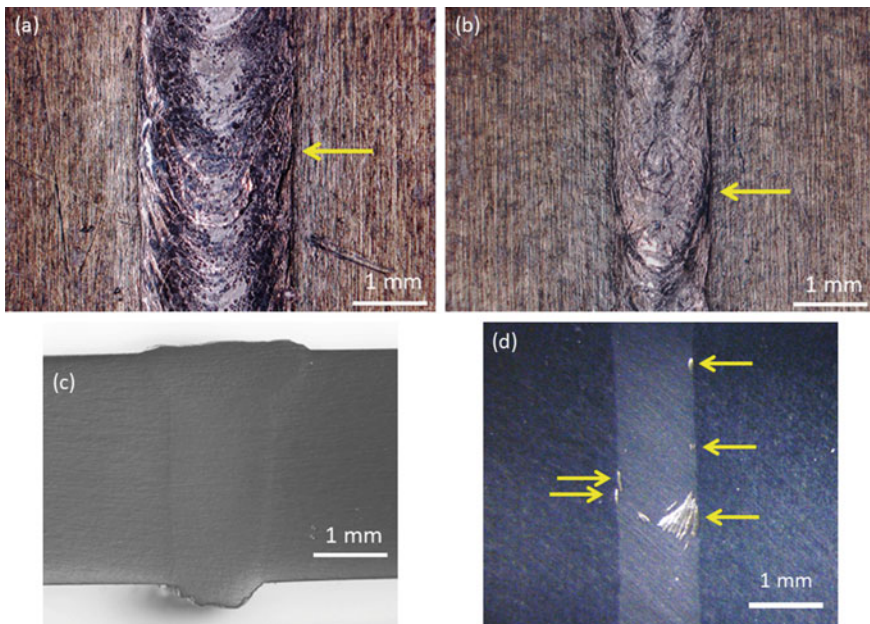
Optical microscopy images of a top surface, b bottom surface, c cross-section of the laser-weld bead, and d bottom surface of reinforcement-removed welded specimen [55]
